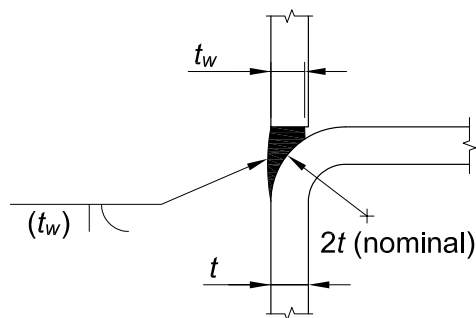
Flare bevel weld, equal width HSS weld joint.
